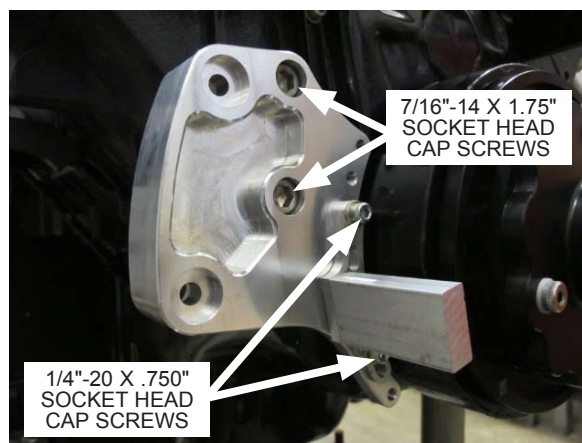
b: Mark center of crank trigger wheel on crank trigger mount
